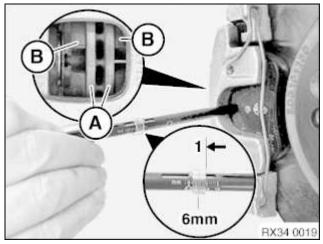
Measuring Brake Pad Thickness Using Special Tool (34 1 260) Courtesy of BMW OF NORTH AMERICA, INC.
